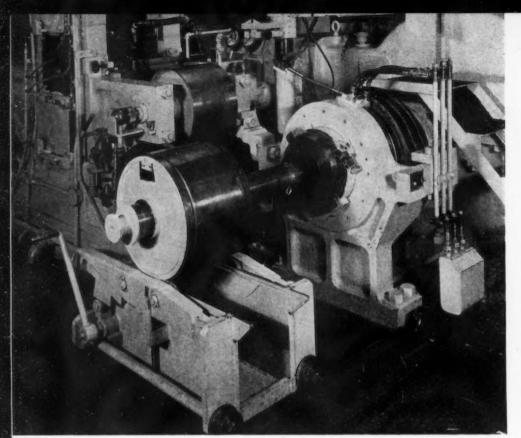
Method of placing an empty reel into position in the mill after a full reel has been removed. Note the hydraulic brakes for maintaining back tension in the strip.
